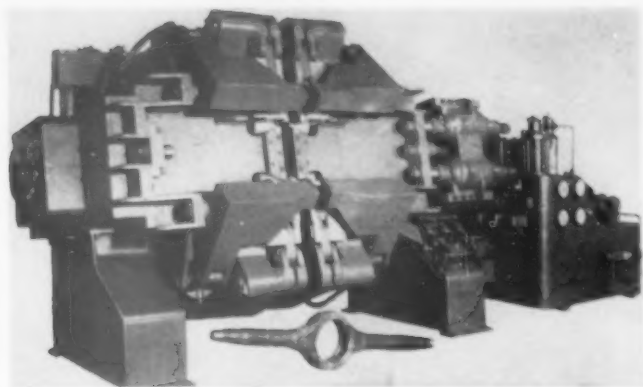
Automatic hydraulic welder with clamp fixtures for welding two halves of rear axle housings. Platens of the machine are set at angle of 85 deg from horizontal to facilitate loading. Fixtures and backups are designed to produce finished parts with exact overall length and with a true circle in the banjo opening.
